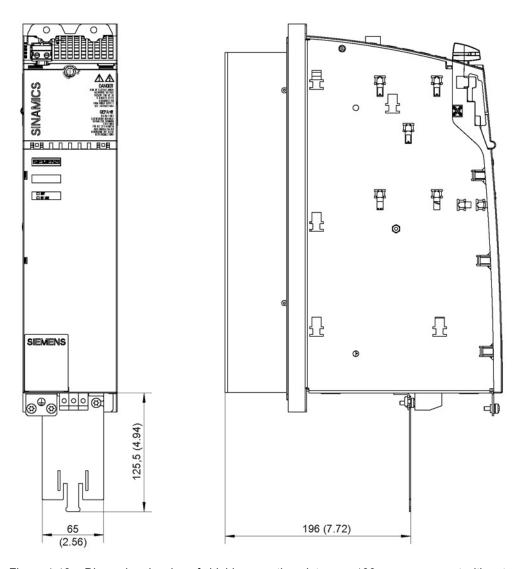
Dimension drawing of shield connecting plate on a 100 mm component with external air cooling, all dimensions in mm and (inches)
